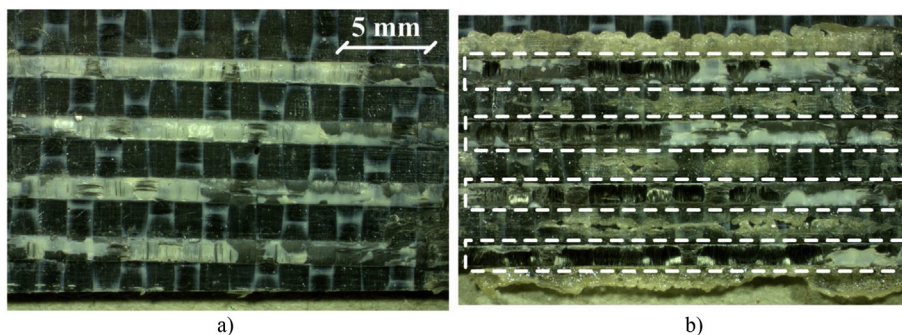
Fracture surfaces of the a) bottom and b) top adherends of specimen B01-04 (batch 1), welded with travel equal to 0.36 mm. In a) it is possible to see rows of whitish remnant EDs. In b) it is possible to see welded areas (highlighted by dashed-line rectangles) interspersed with unwelded areas (zones between the dashed-line rectangles). Also in b) irregular flow fronts in the unwelded areas indicate melt, incomplete squeeze-out and resolidification of the EDs.
